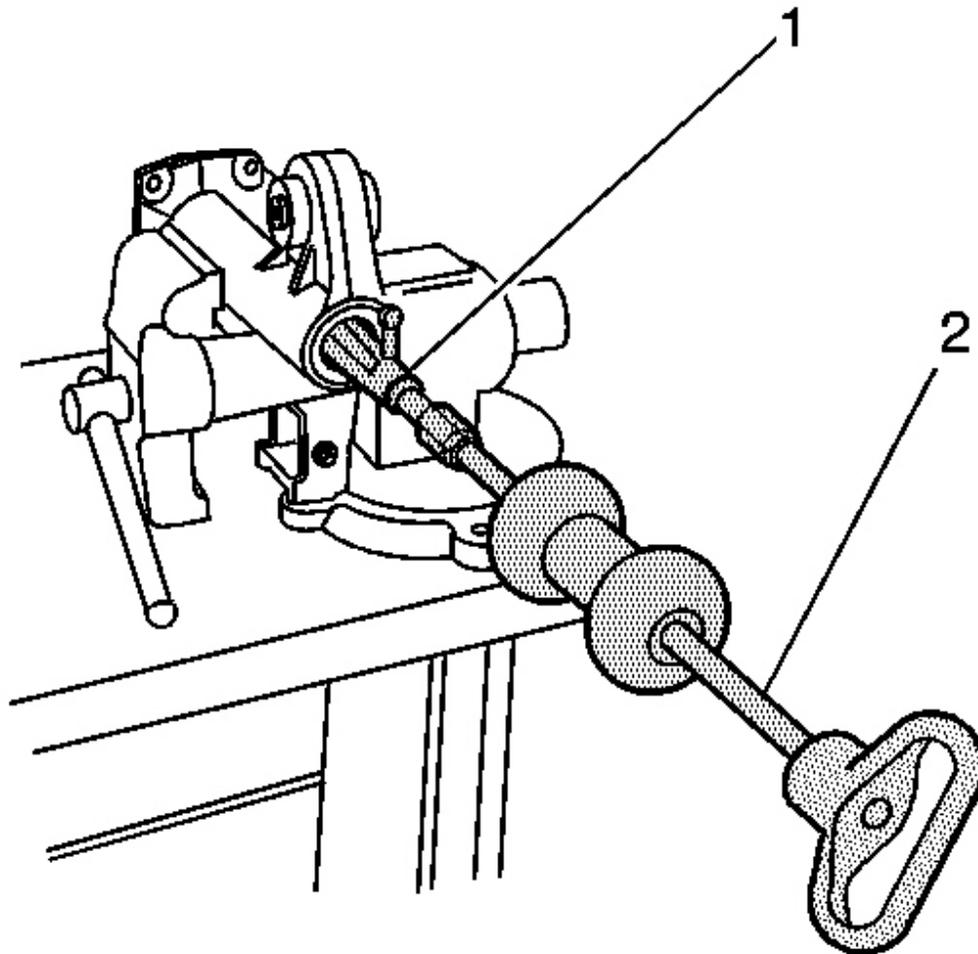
Installing J 29369-02 Behind Inner Axle Shaft Seal
